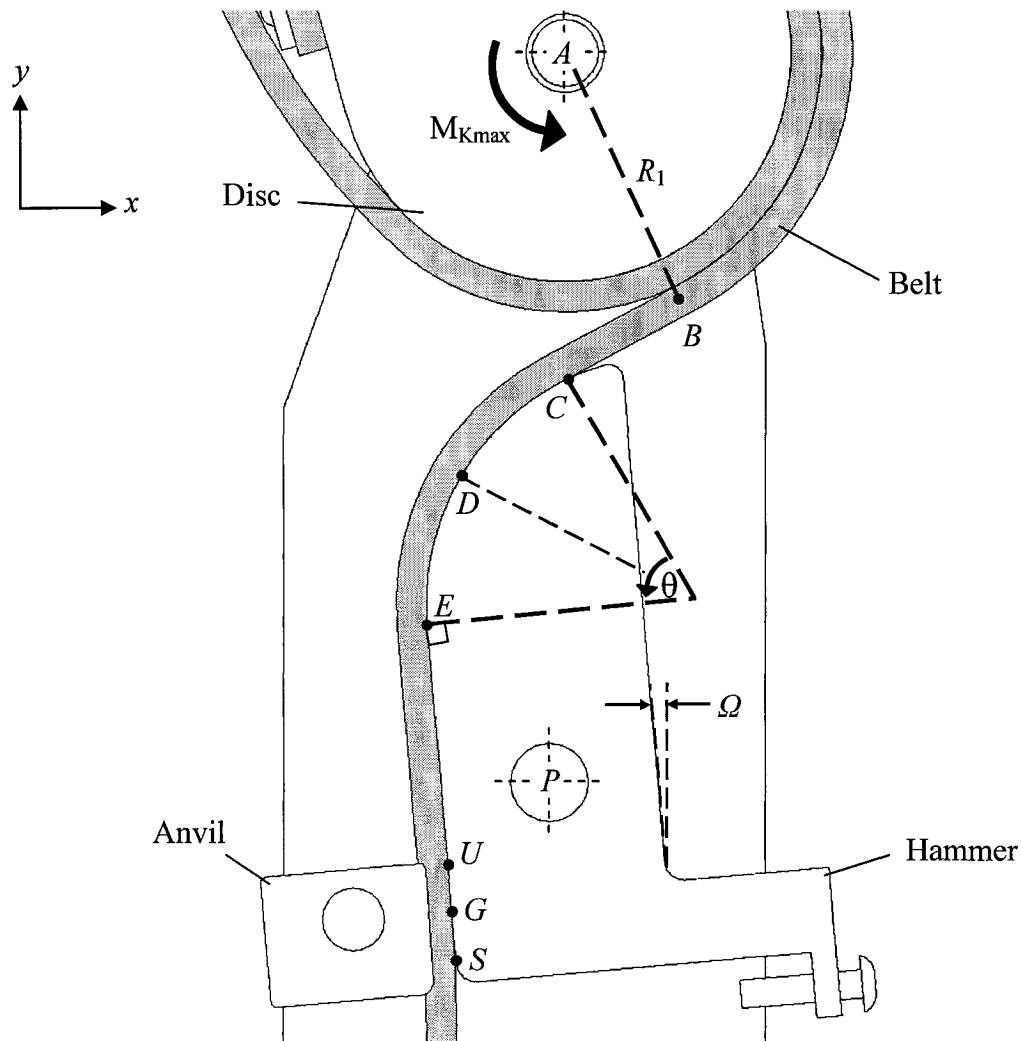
Enlarged drawing of the dynamic knee joint showing relevant landmarks and dimensions.
